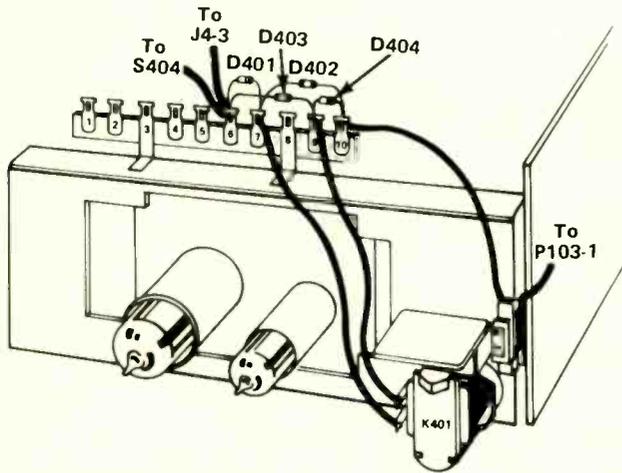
Tuner assembly removed from cabinet to show component location of early production circuit.
